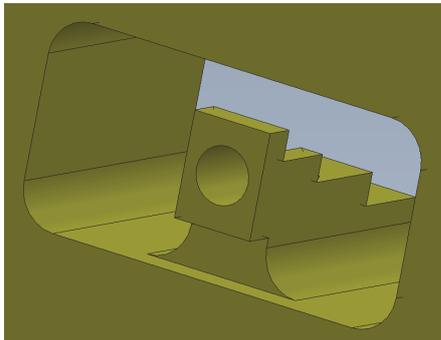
Integrated hole 0.6-mm Flange to WR5 in-line shim transition
